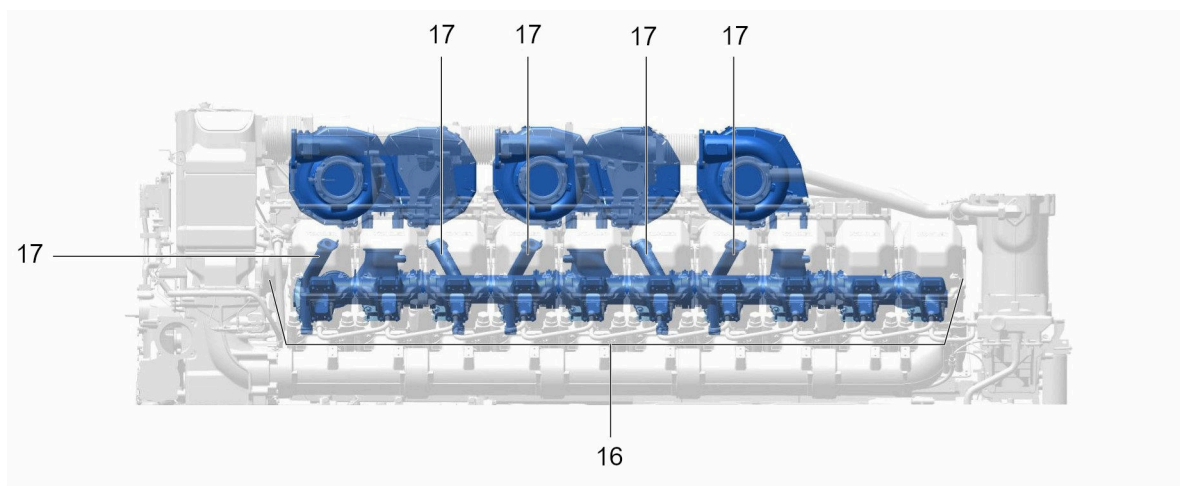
Visual inspection of Diesel engine (4)
